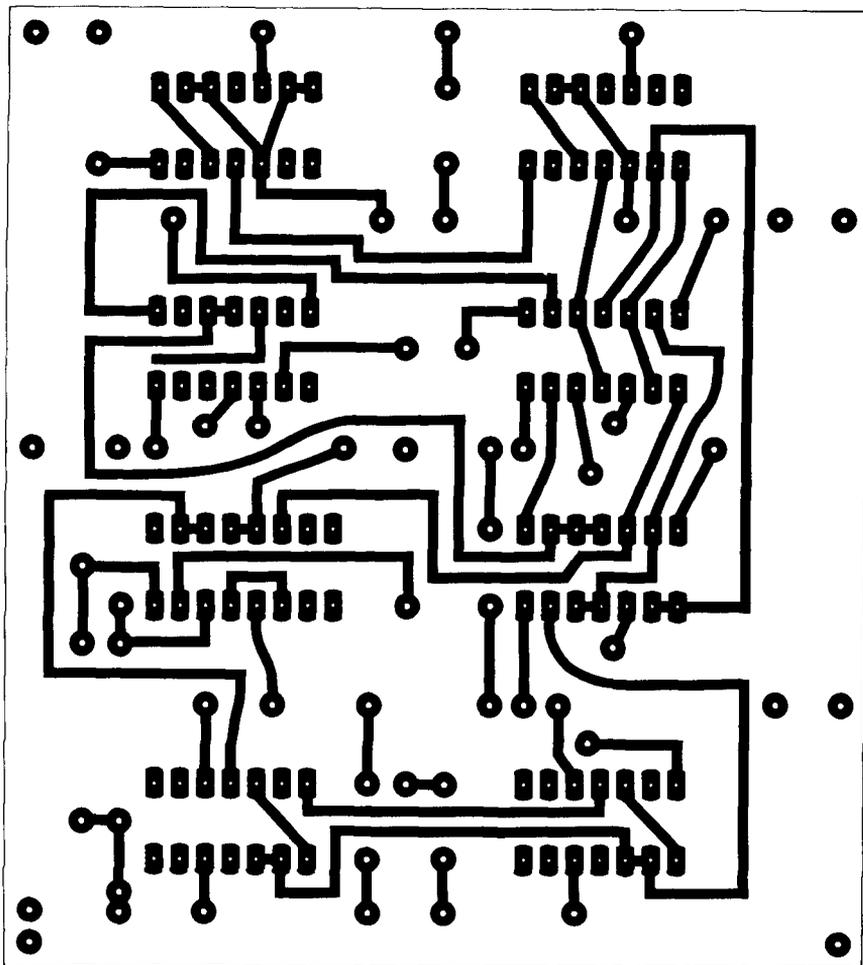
Circuit board layout for the frequency lock loop. Shown above is the back side of the board, with most of the interconnecting wiring; drawing on next page shows the top side of the board and the parts placement diagram. Although not included in fig. 5, this board contains an additional 7490 which is one of the input dividers from the oscillator. Also not shown in fig. 5 are the numerous 0.1- μ F bypass capacitors included on the board.
